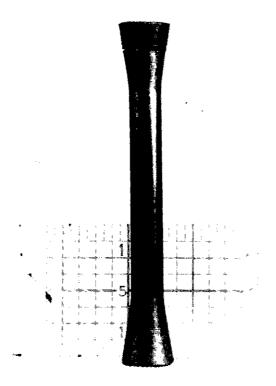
Photograph of Specimen With a Compressive Fracture Caused by the Ridge Shown in Figure 6
